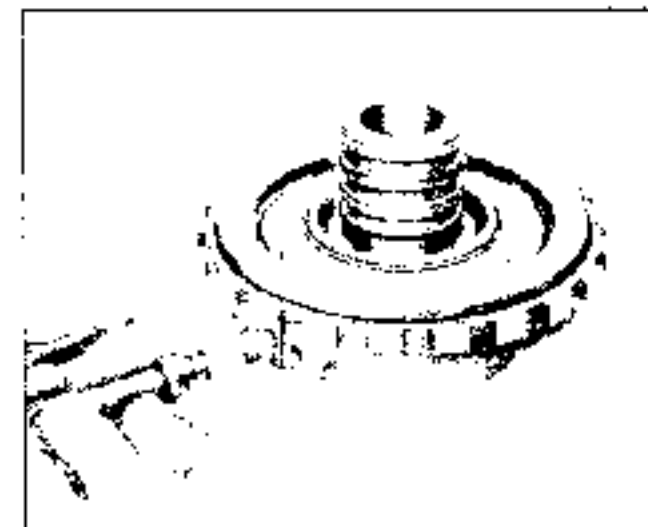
E-114 Air Checking Intermediate Clutch Piston
